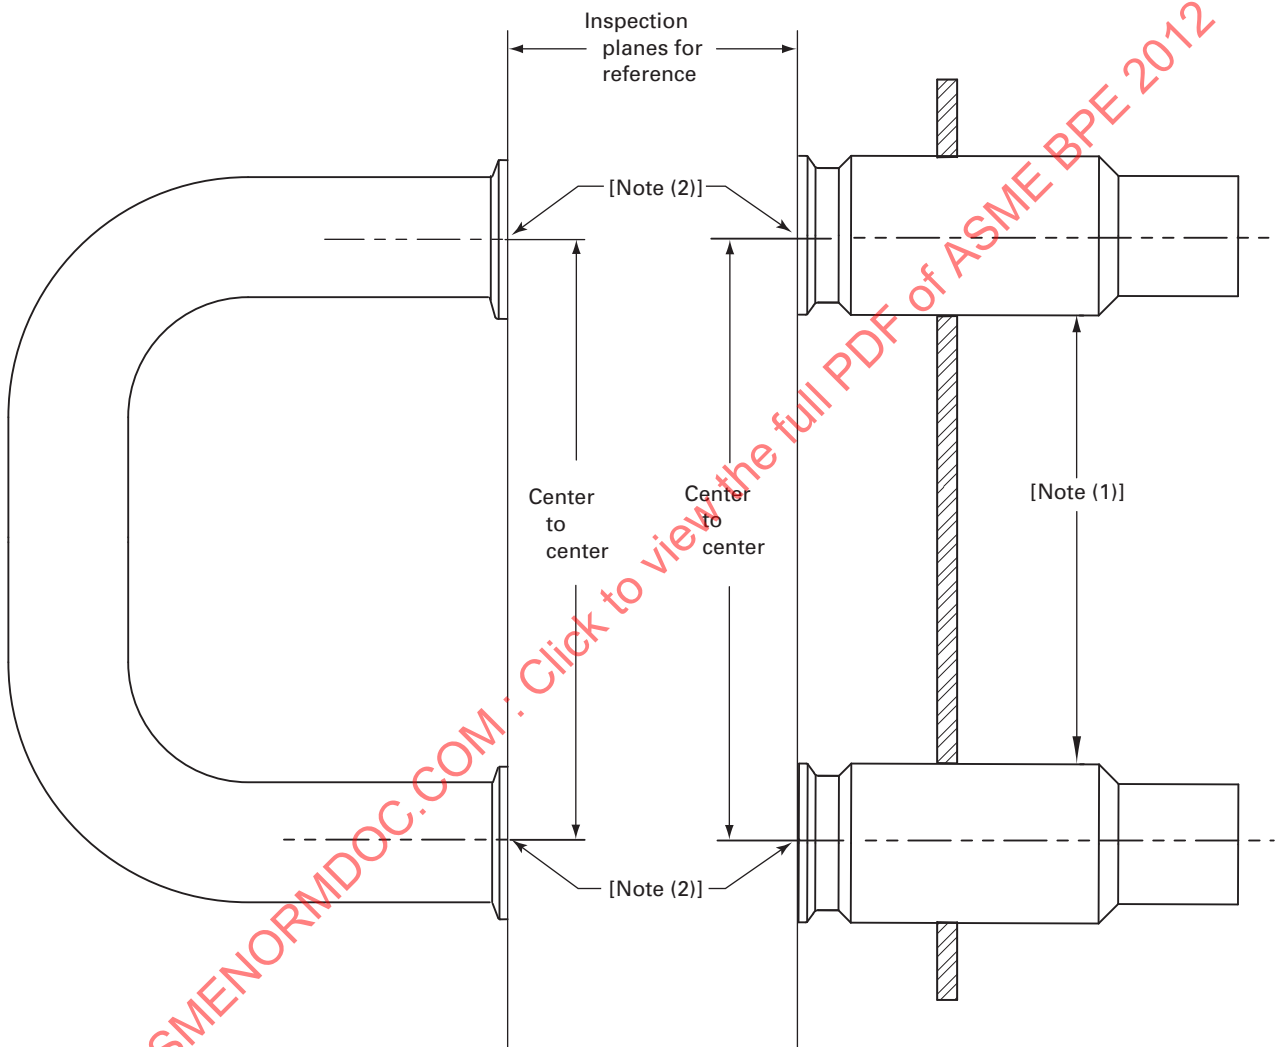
Transfer Panel Looped Headers
